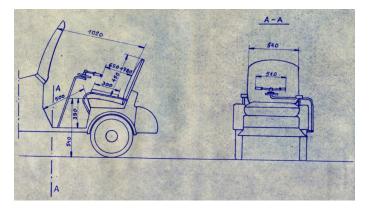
Manual drive engagement wheel activated by lever on the right hand side [1]
